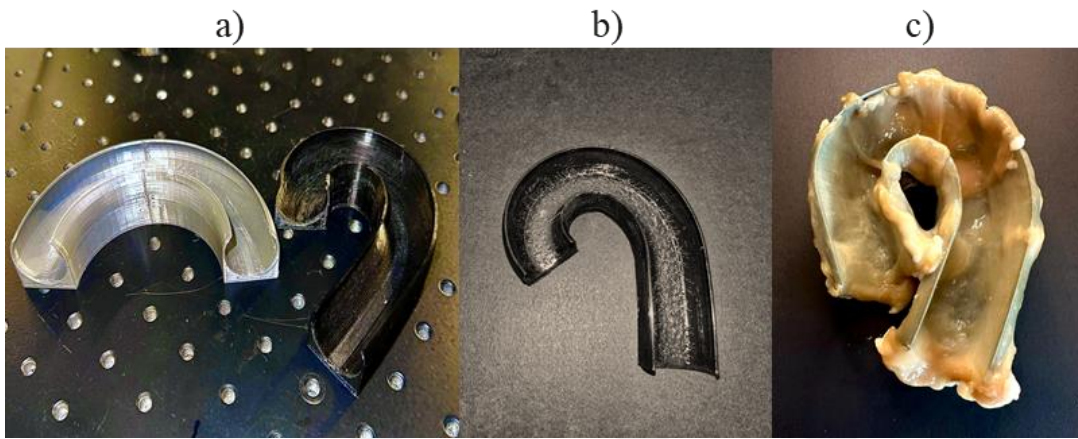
Illustration of three varying capsule-spring configurations: a) Baseline design, b) Second design with half spring and capsule, c) final design with full capsule that encloses the capsule.
